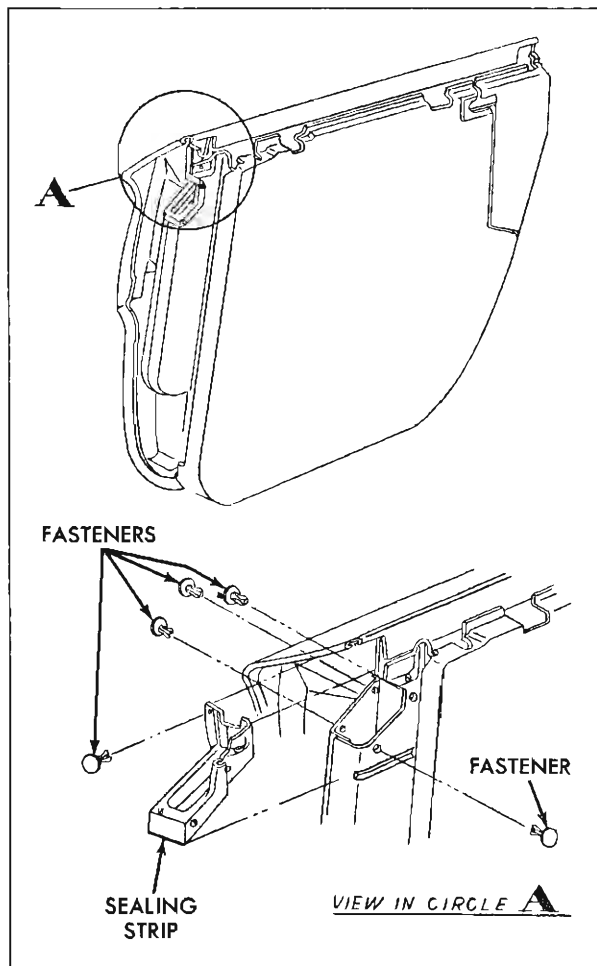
Rear Door Hinge Pillar Sealing Strip
